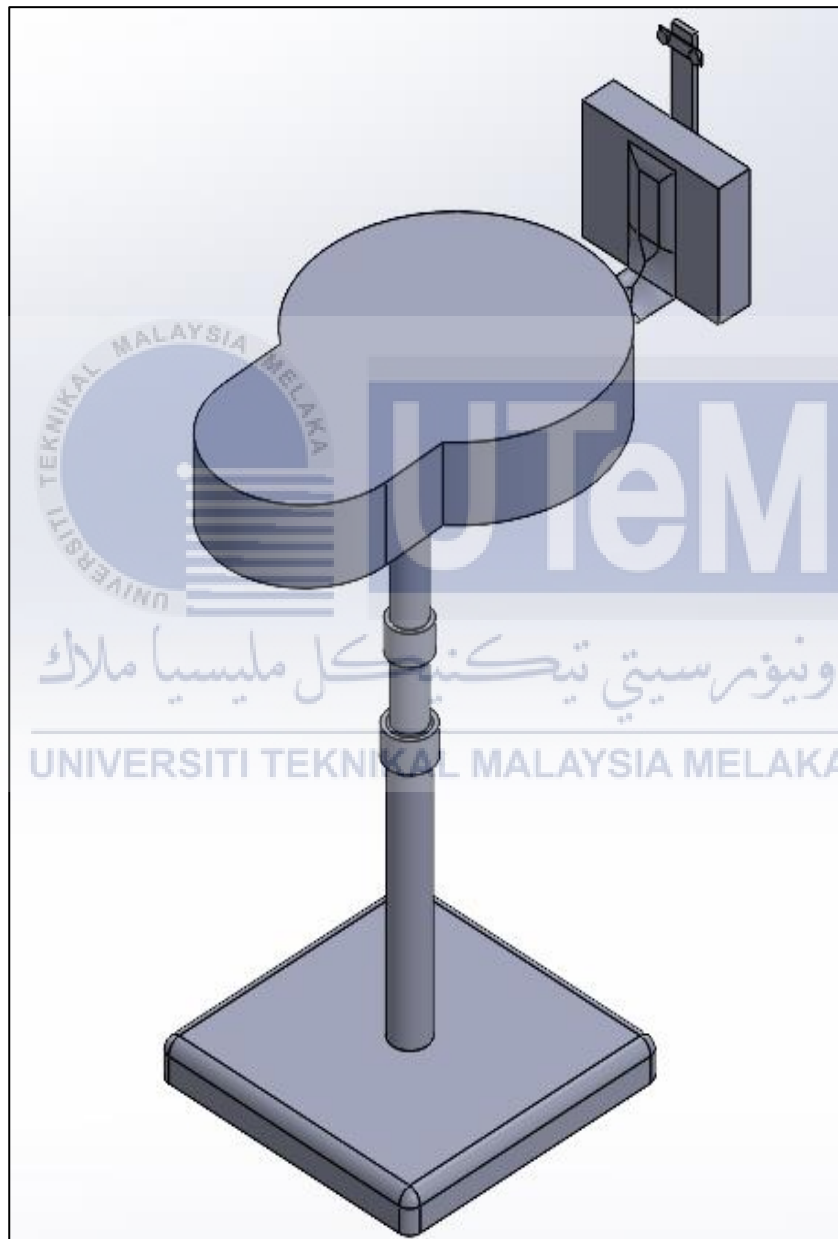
Design 1 of Smart Modular Lower Body Support
